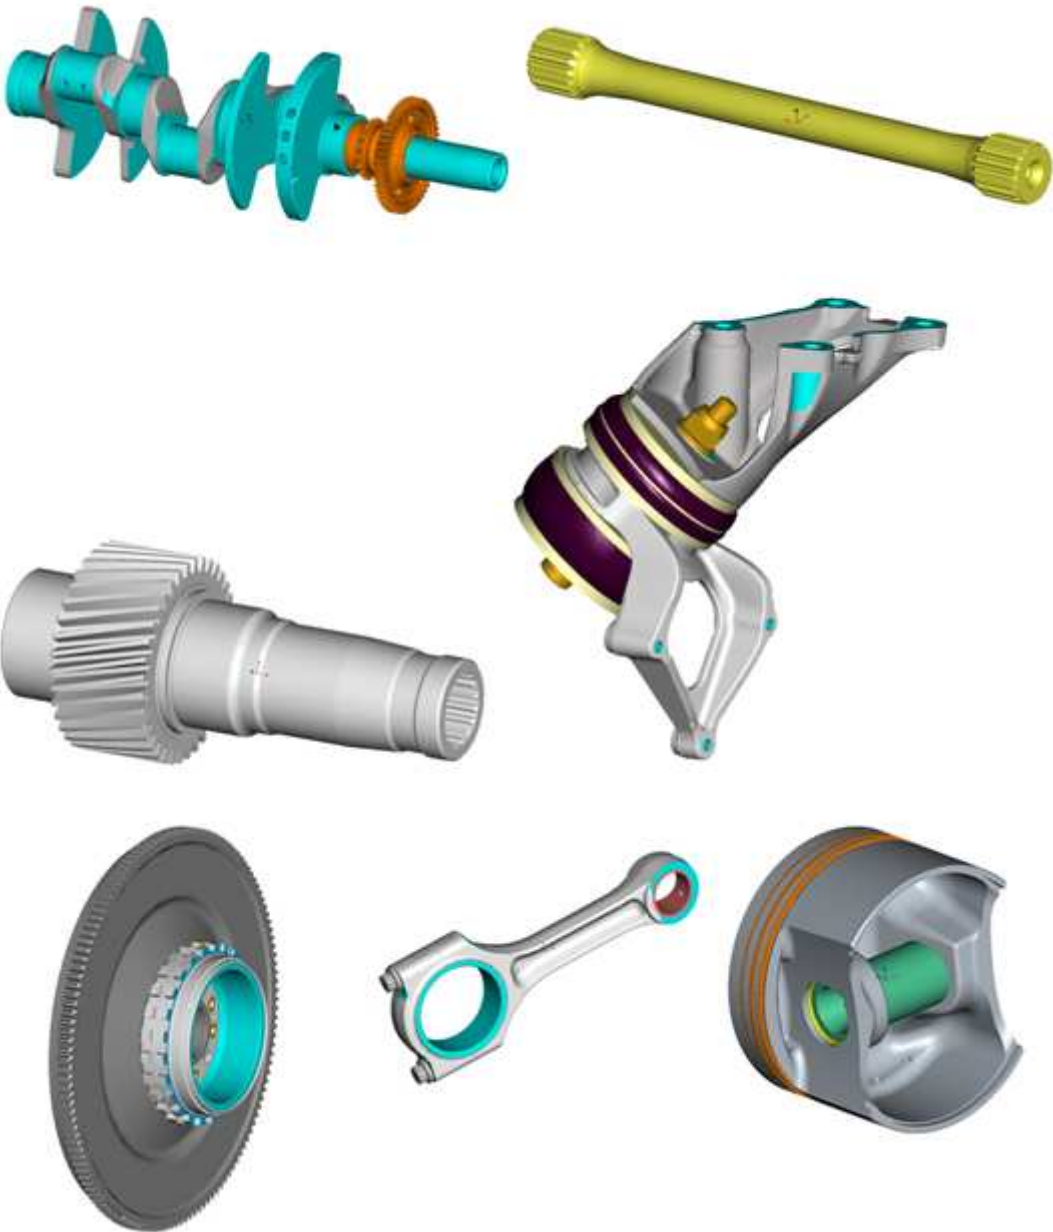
Overview of engine parts of the power train system. Top: Crankshaft left hand side and torsion bar right. Middle: Pinion shaft left hand side and silent block with fixation to the right. Bottom: Hydro damper with tooth wheel left hand side, to the right the connecting rod and the piston.
